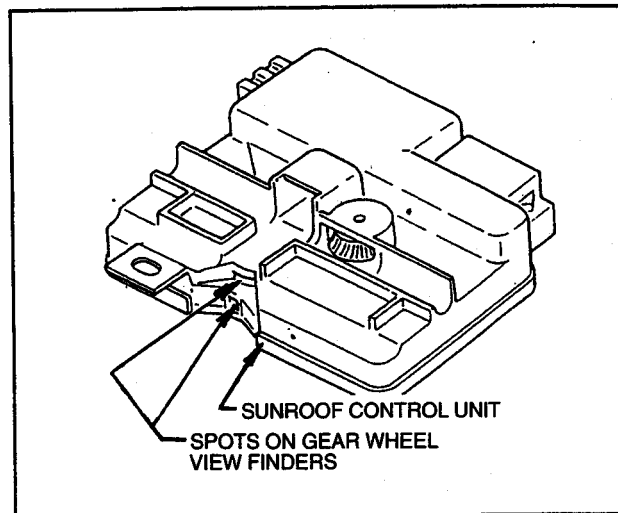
Checking alignment of Spots on Gear Wheel.
